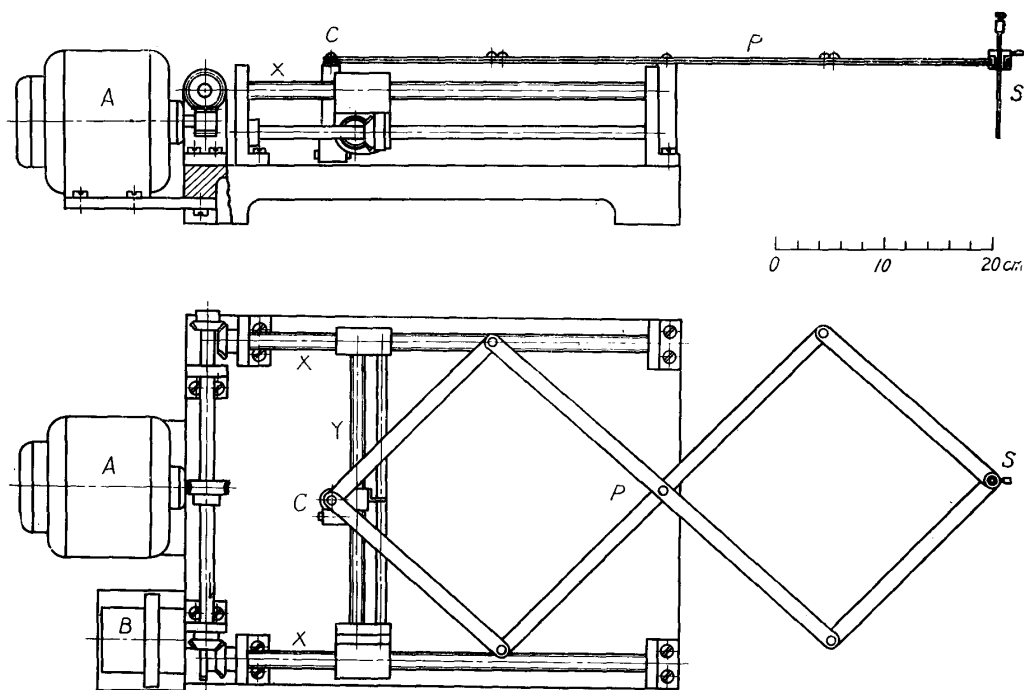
Schematic diagram of mechanical part, plan and elevation.
